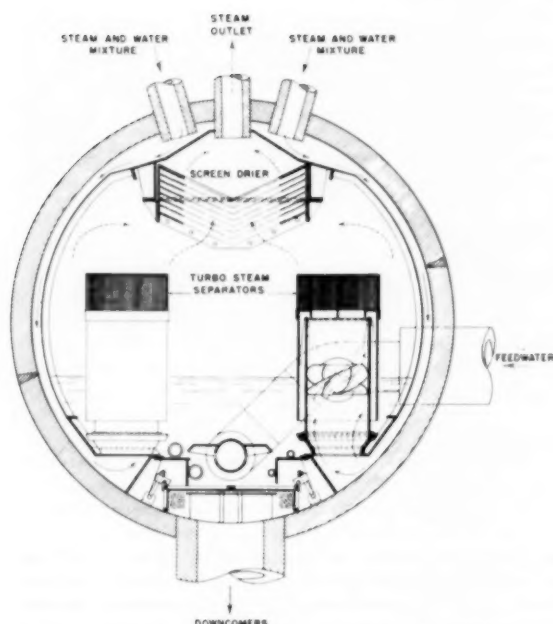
SECTION OF DRUM SHOWING CYCLONE SEPARATOR AND DRUM INTERNALS
